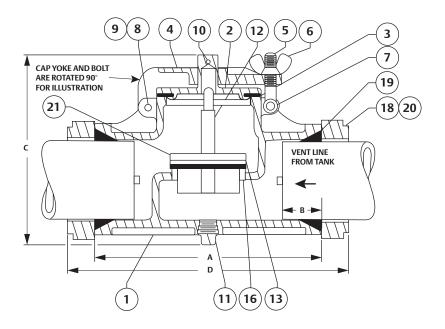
Enardo™ 800-PSO In-Line Vent Valve Dimensions
